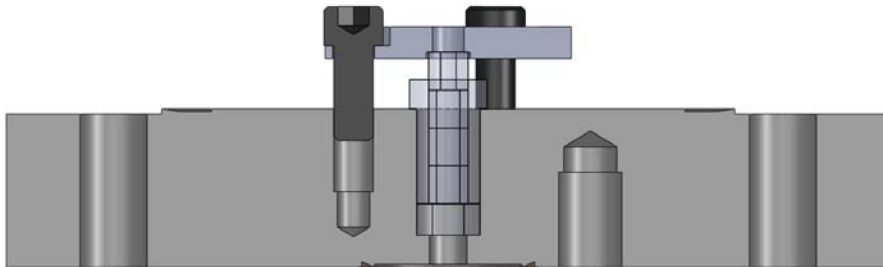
Conflat Flange seal-stackup bolting configuration
